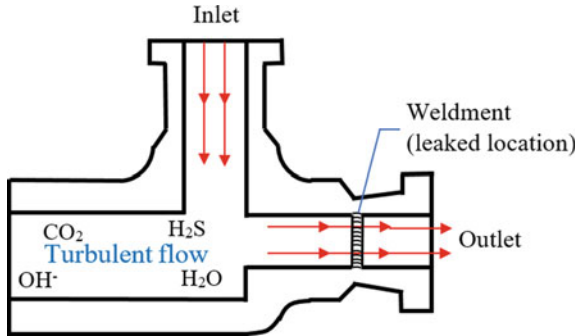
Schematic diagram of leaked locations at weldment and the surrounding environment of the choke body
